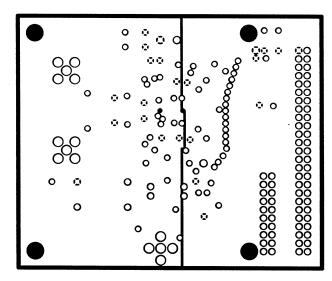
AD6600ST/PCB Power Supply Layer (Negative)
